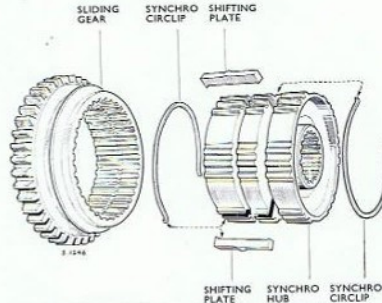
Exploded view of the first and second speed synchronising hub assembly
